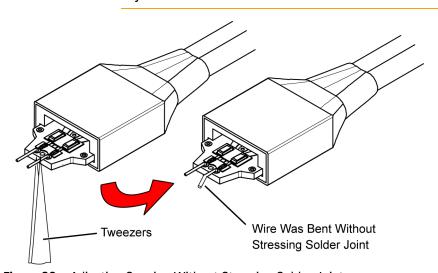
Adjusting Spacing Without Stressing Solder Joint
